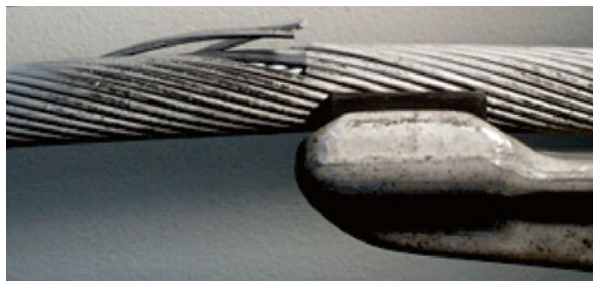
Fatigue failure at spacer-damper clamp.
